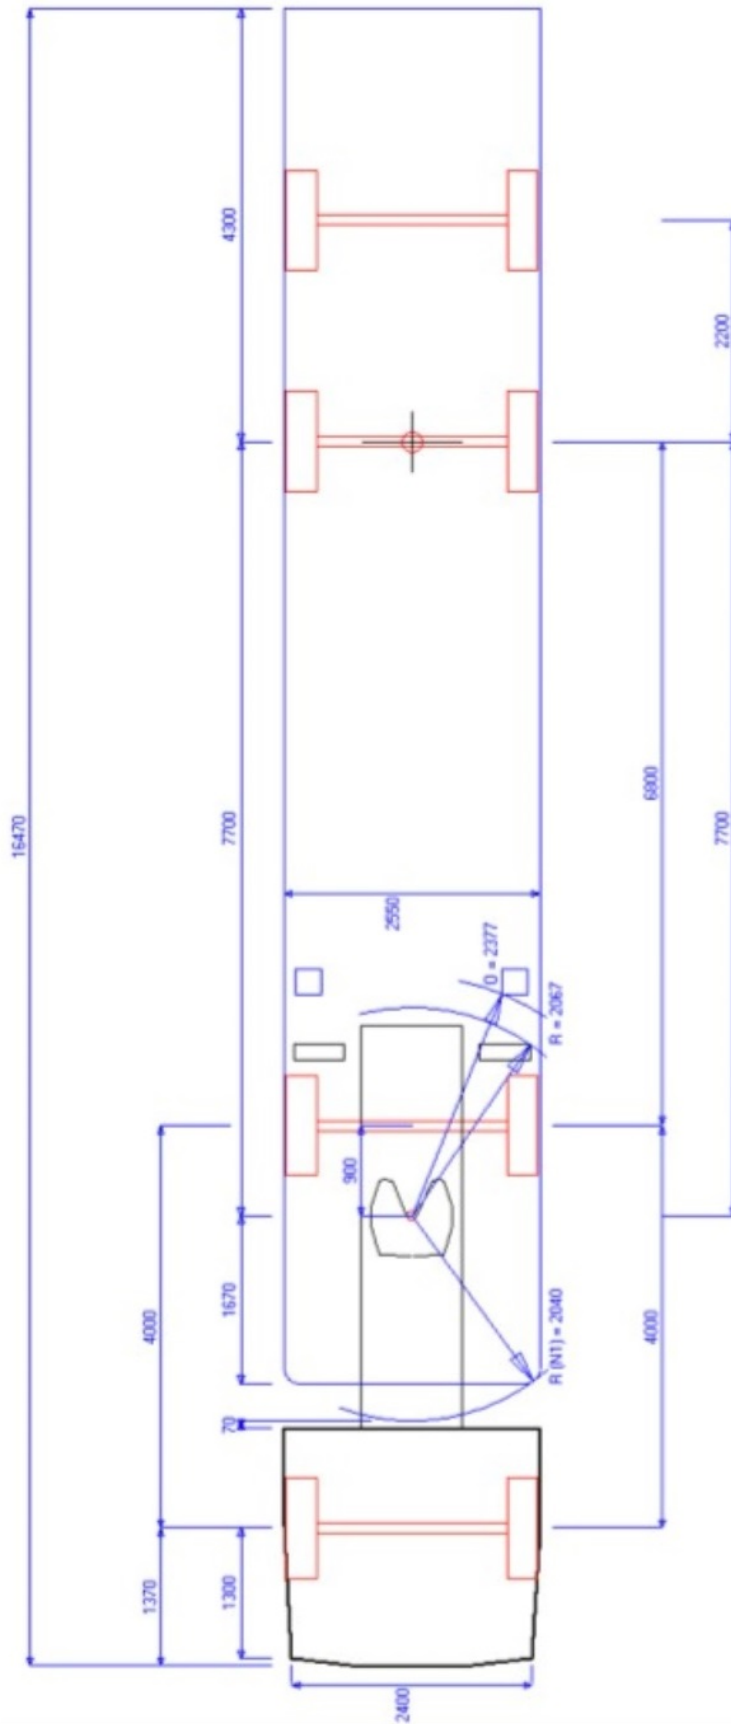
Dimensions of 4 axle tractor semi-trailer
